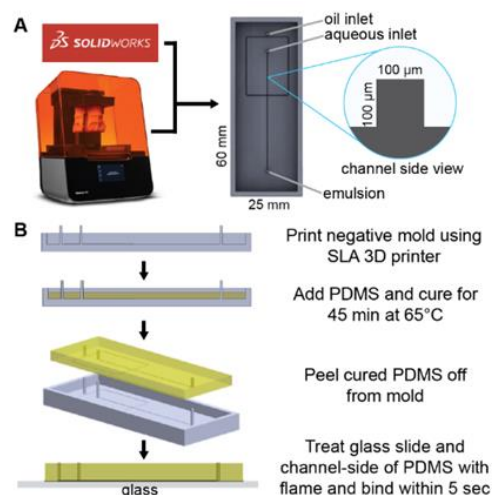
Microfluidic device design and fabrication. (A) A solid master mold was designed with Solidworks CAD software and printed with FormLabs Form3 SLA printer. (B) PDMS device fabrication process.
